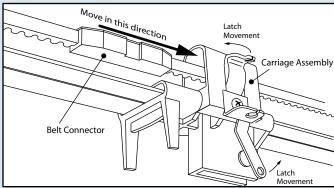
Engage Chain/Belt Connector to Carriage.
